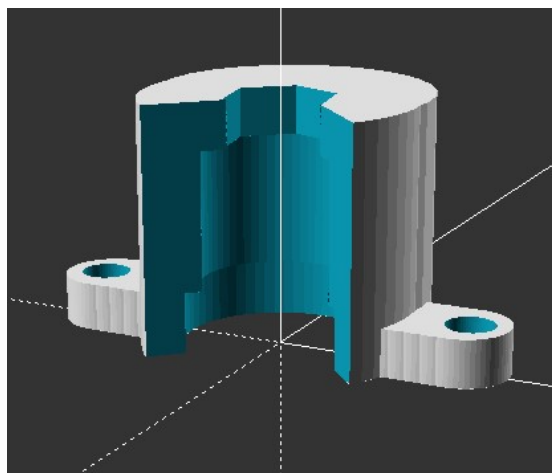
Nozzle holding component designed to fasten the end of the flexible pipe carrying polymer, and the dispensing needle, to the effector head. Designed in OpenSCAD and scaleable to the dimensions of the purchased component.
